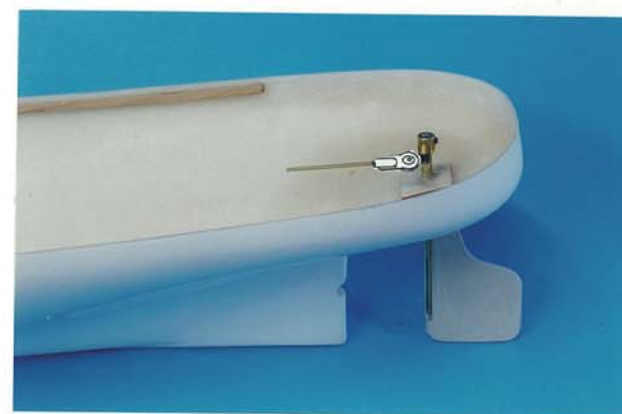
A Setting the rudder horn, adjuster, rod and other parts
